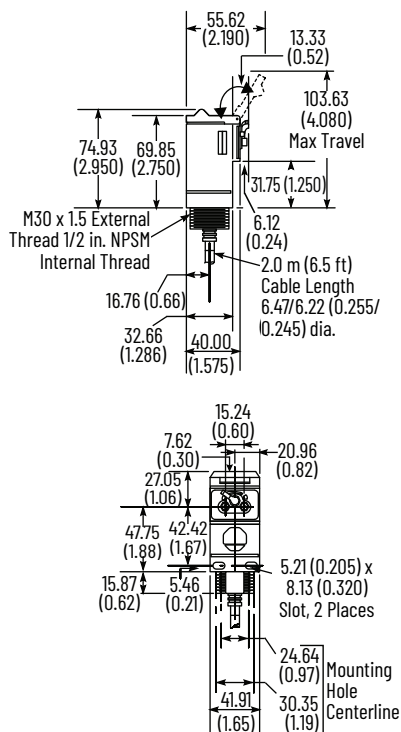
ClearSight™ 9000 Sensor – Cable Version
